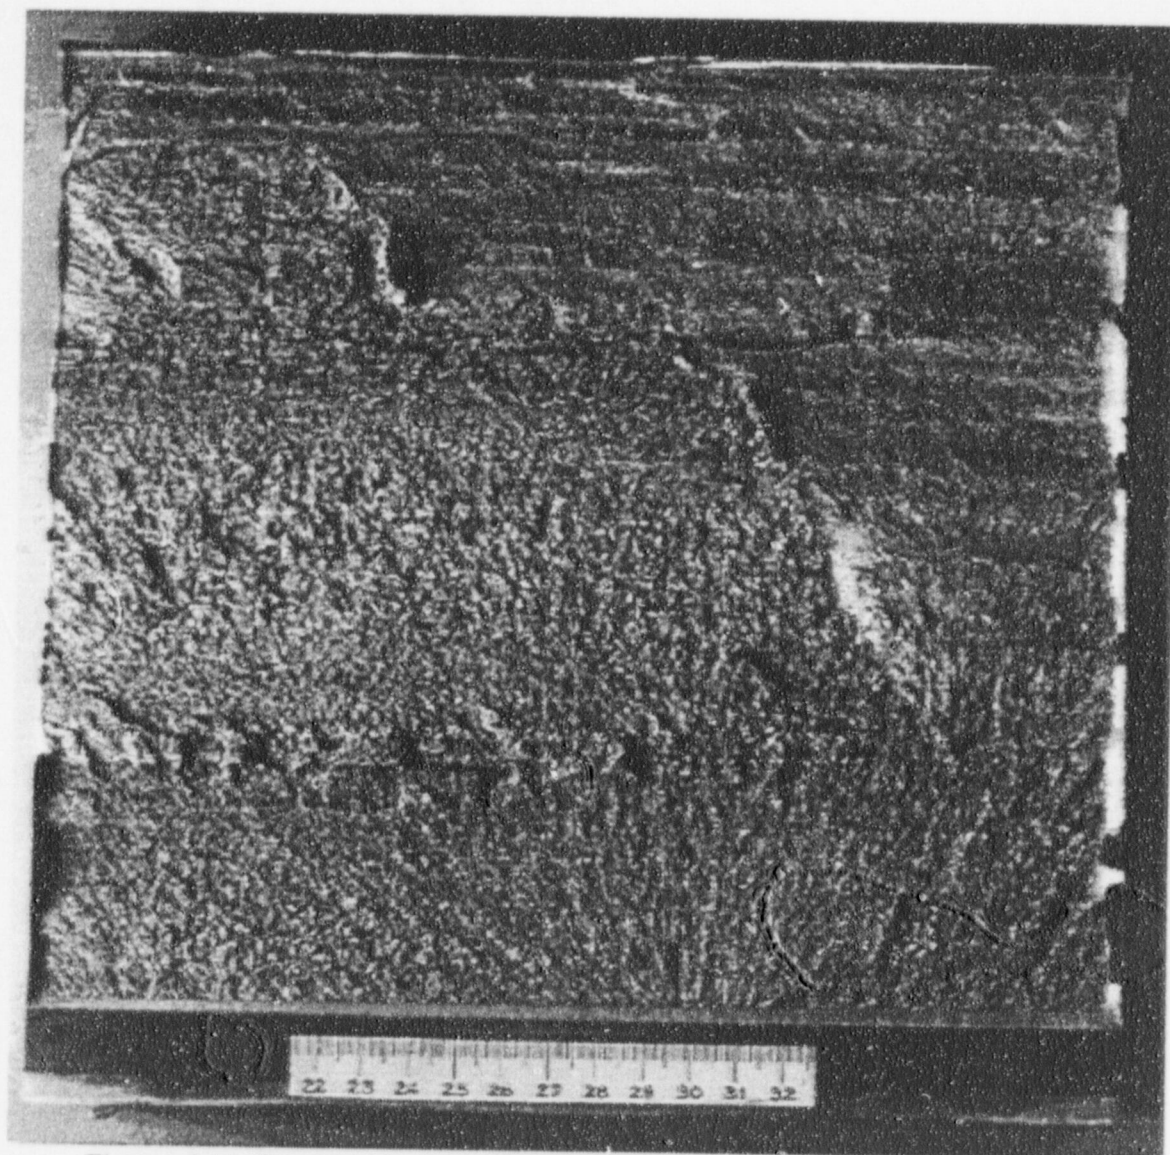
Fracture surface of full-thickness clad beam specimen CB-1.4
